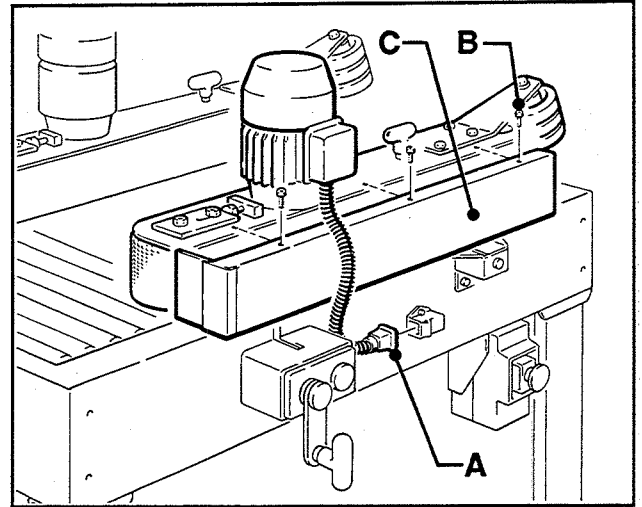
Box Drive Belt (Case Sealer Left Side, Discharge End)
